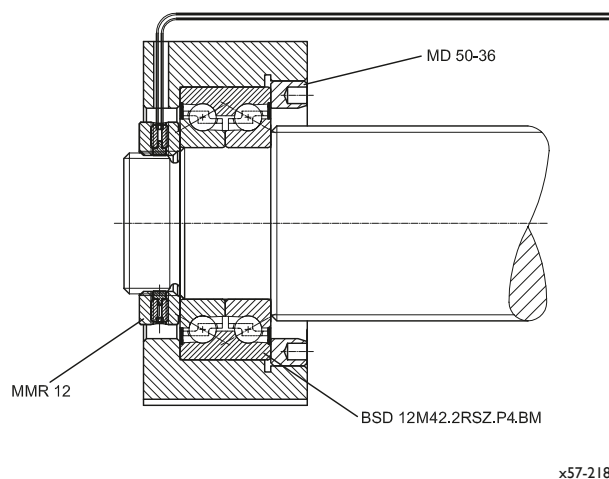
Mounting of a precision 60° ball screw support bearing in a compact pillow block housing
